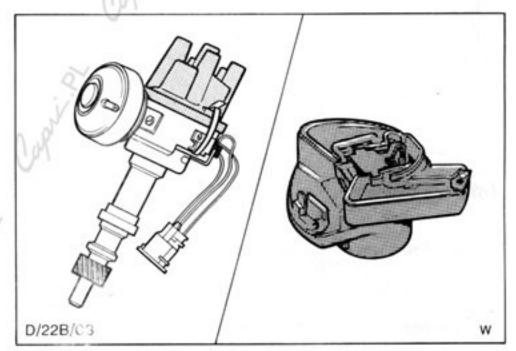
Breakerless distributor and rotor arm with built in rev limiter.
